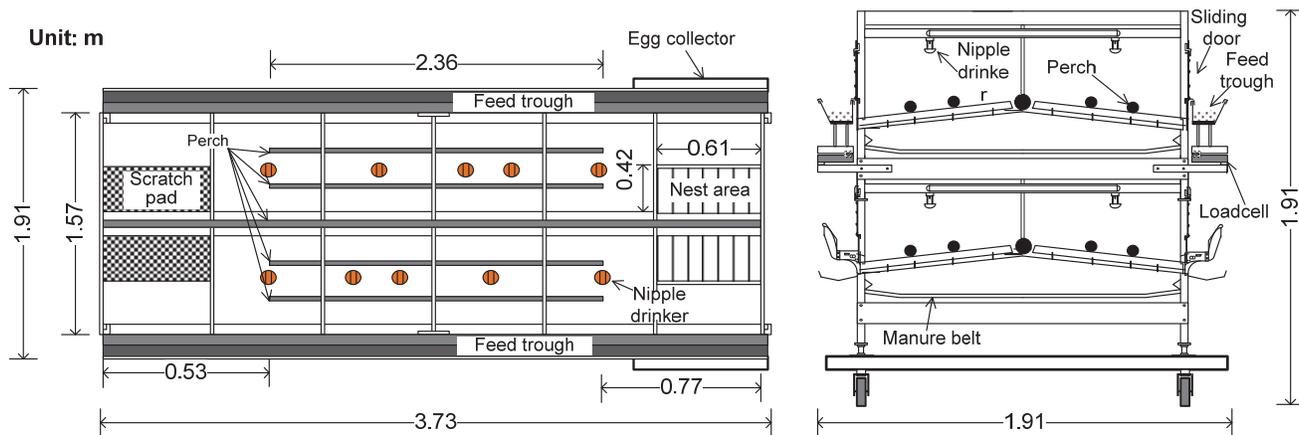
Top view (left) and side view (right) schematic drawings of the enriched colony housing (ECH) module.
